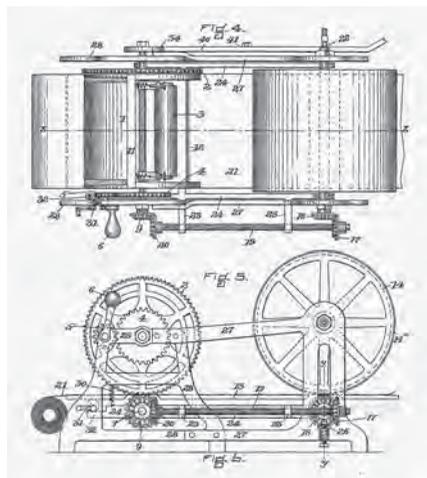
F. T. Miller. *Copying Machine.* (1897)
